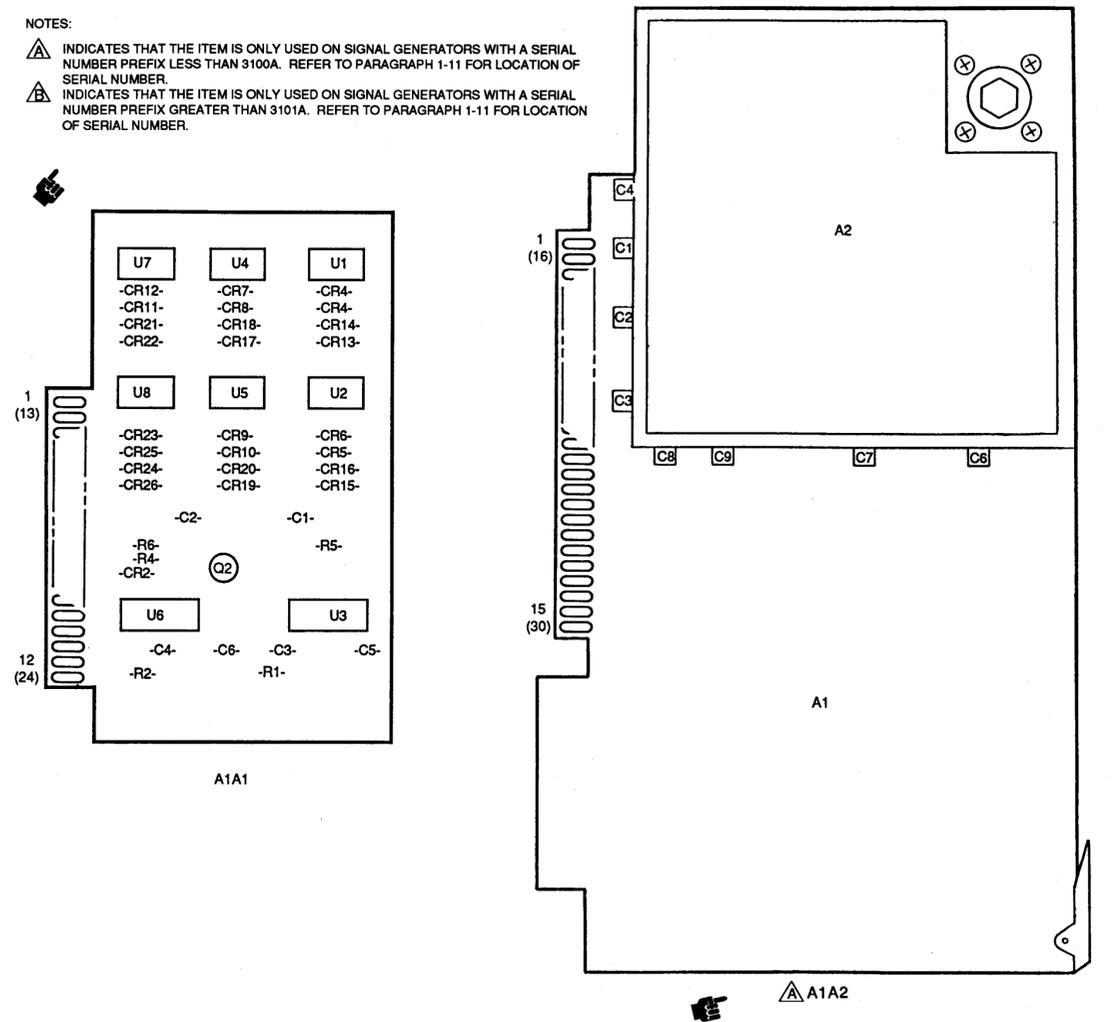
A1 Assembly Component Locator Diagram (Sheet 1 of 2).
